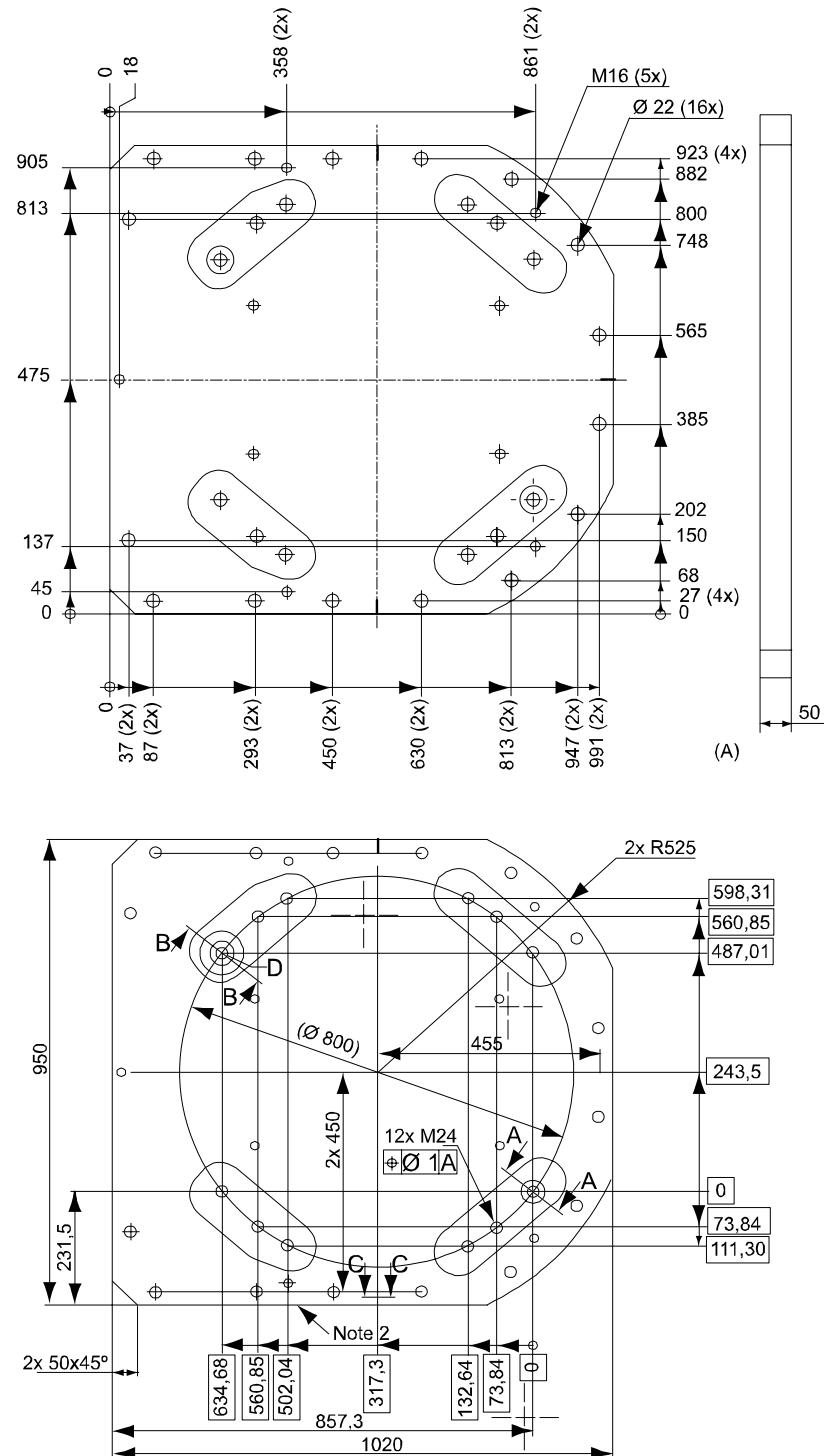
Base plate dimension print, main dimensions and holes measurements (dimensions in mm).
